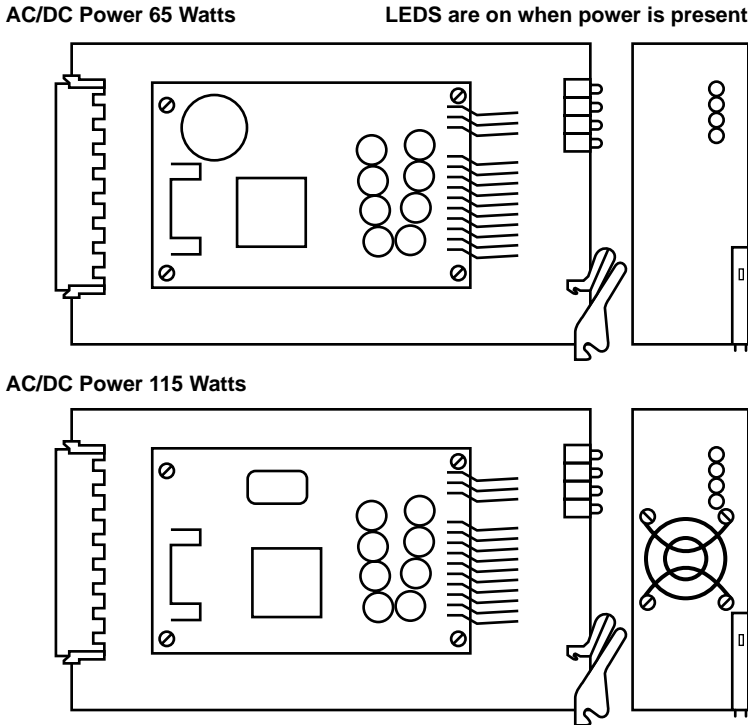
AC and DC Power Supply Front Plug Assemblies.
